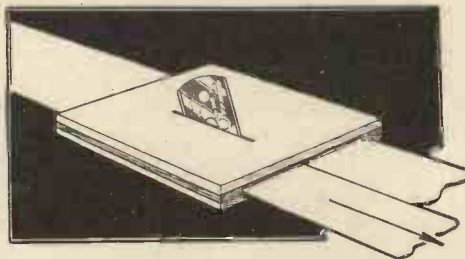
Strips of paper may be cut into narrower strips with this device.
